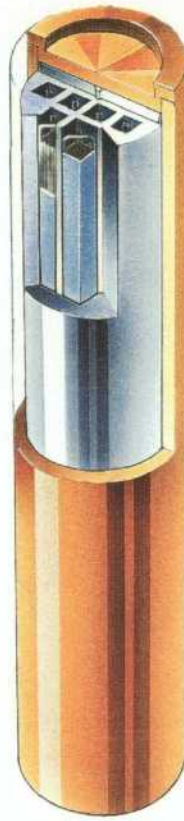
Copper canister with cast insert in which 12 BWR fuel assemblies can be placed.
